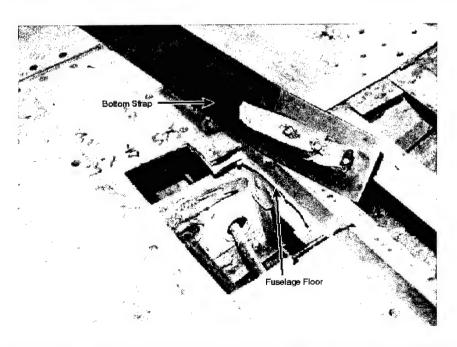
BOTTOM STRAP ATTACHMENT POINT DAMAGE
